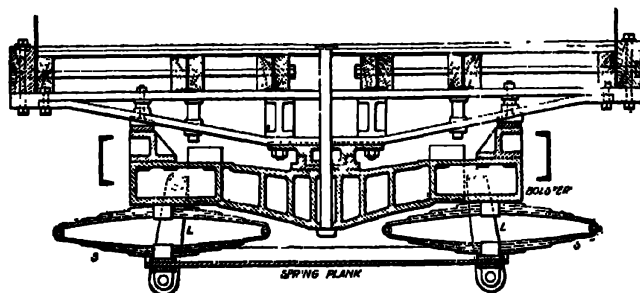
Section of Bolster, Elliptical Springs, and Spring Plank
